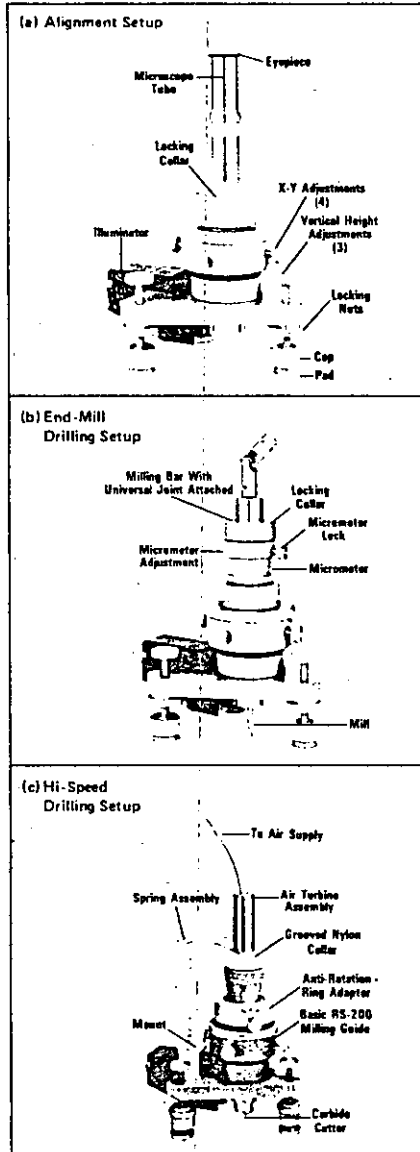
RS-200 Milling Guide used for machining a precisely located flat-bottomed hole
